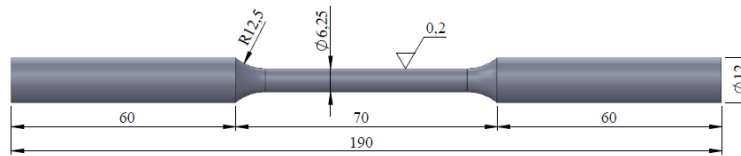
Shape and dimension of tensile specimen (unit in mm)
